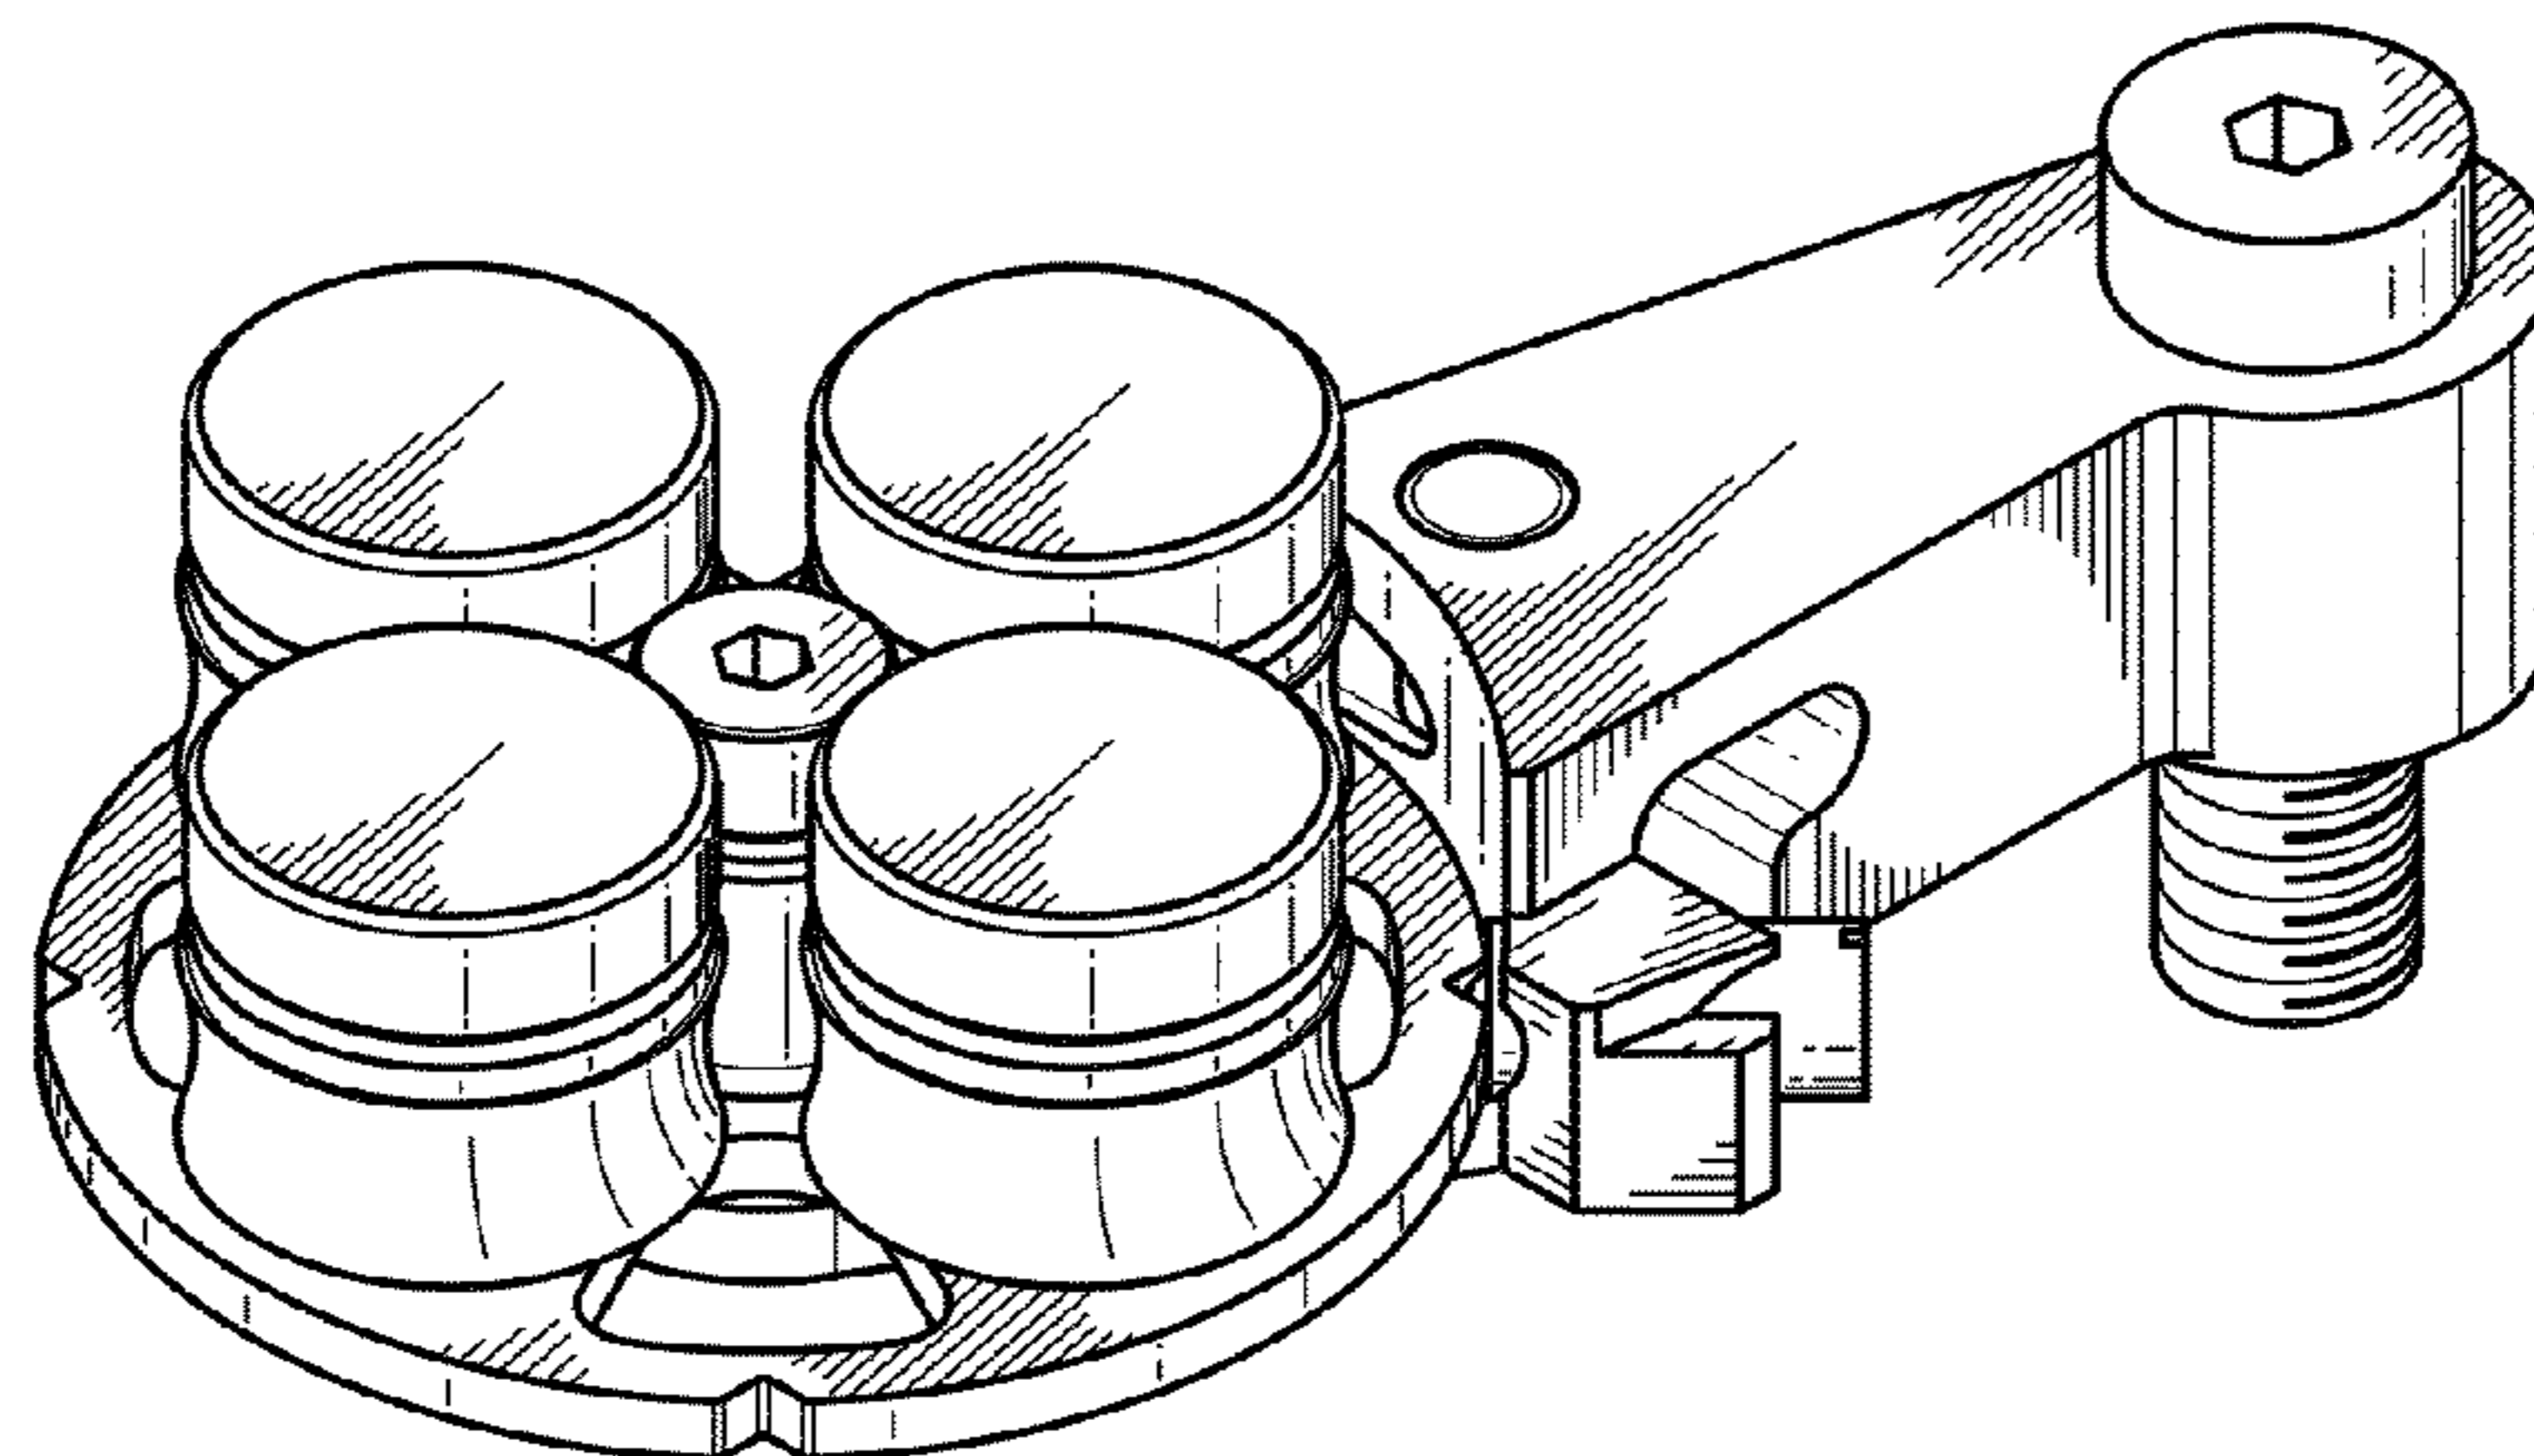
is a side view of the multiple spinner carousel of FIG. 1.
